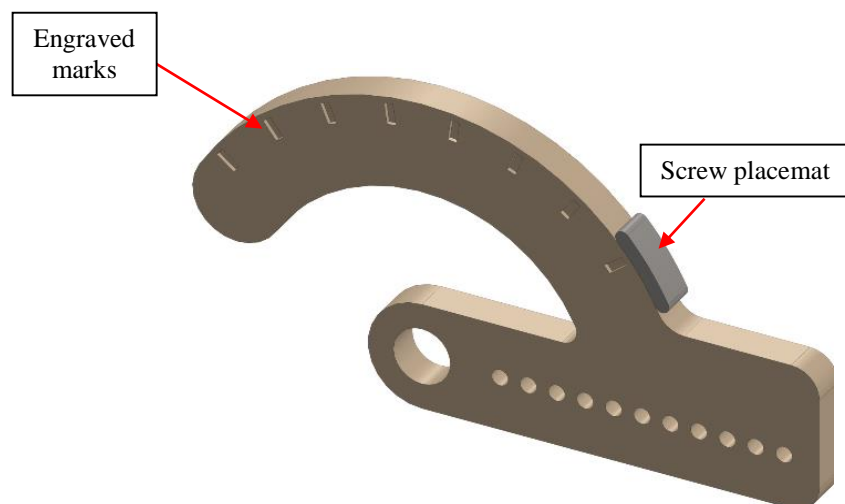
3D design of the proximal protractor part design -1.
